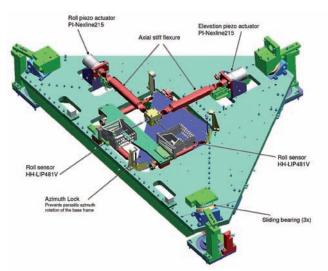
Elevation and roll control mechanism mounted on the support frame with piezo actuators and measuring scales. The central cubic block is connected to the base frame.
